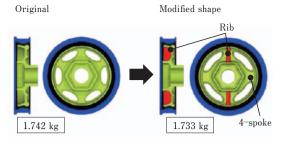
Pulley Shape to Reduce Bending Vibration of Crankshaft⁽³⁾
